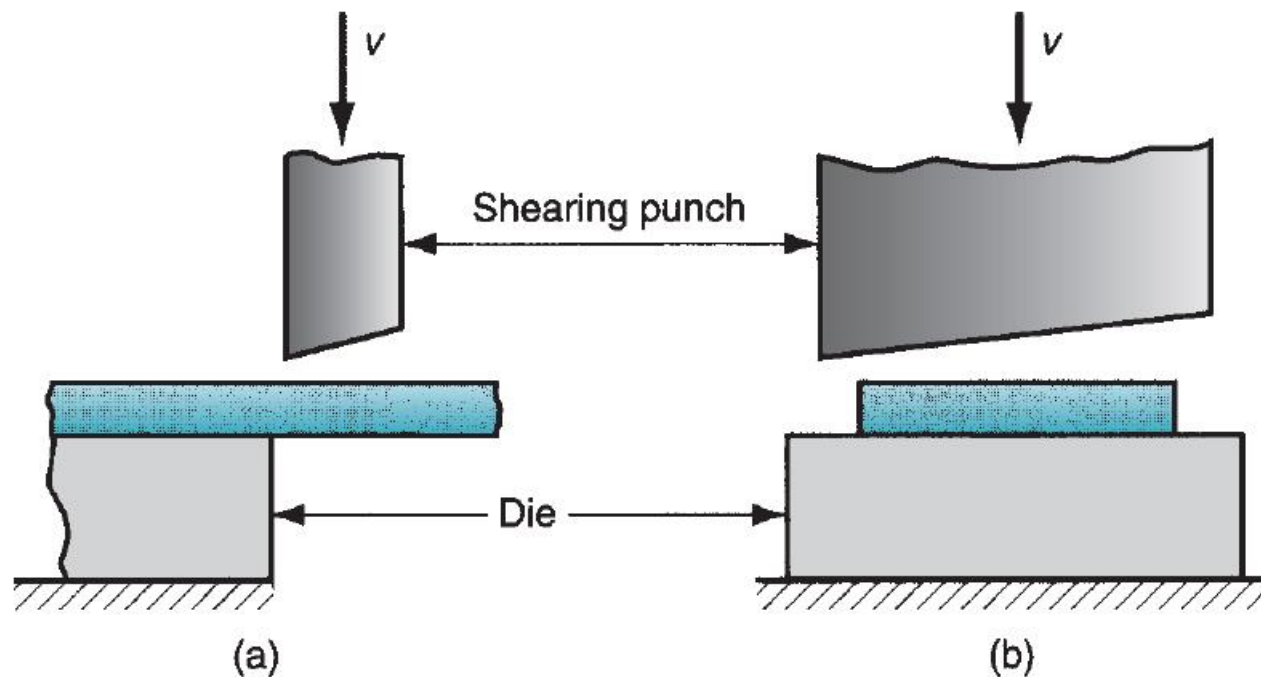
Shearing operation: (a) side view of the shearing operation; (b) front view of power shears equipped with inclined upper cutting blade.
